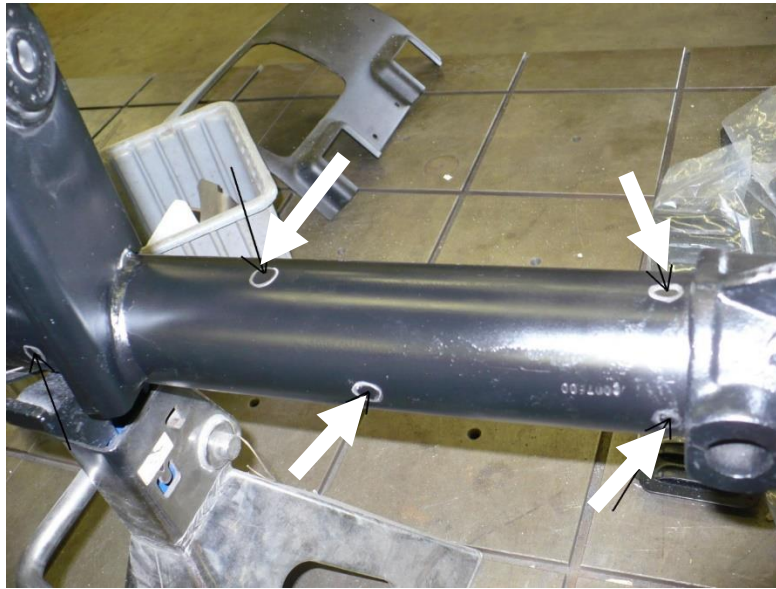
Marking Hole Locations Inside UCA Bracket On Long Side
